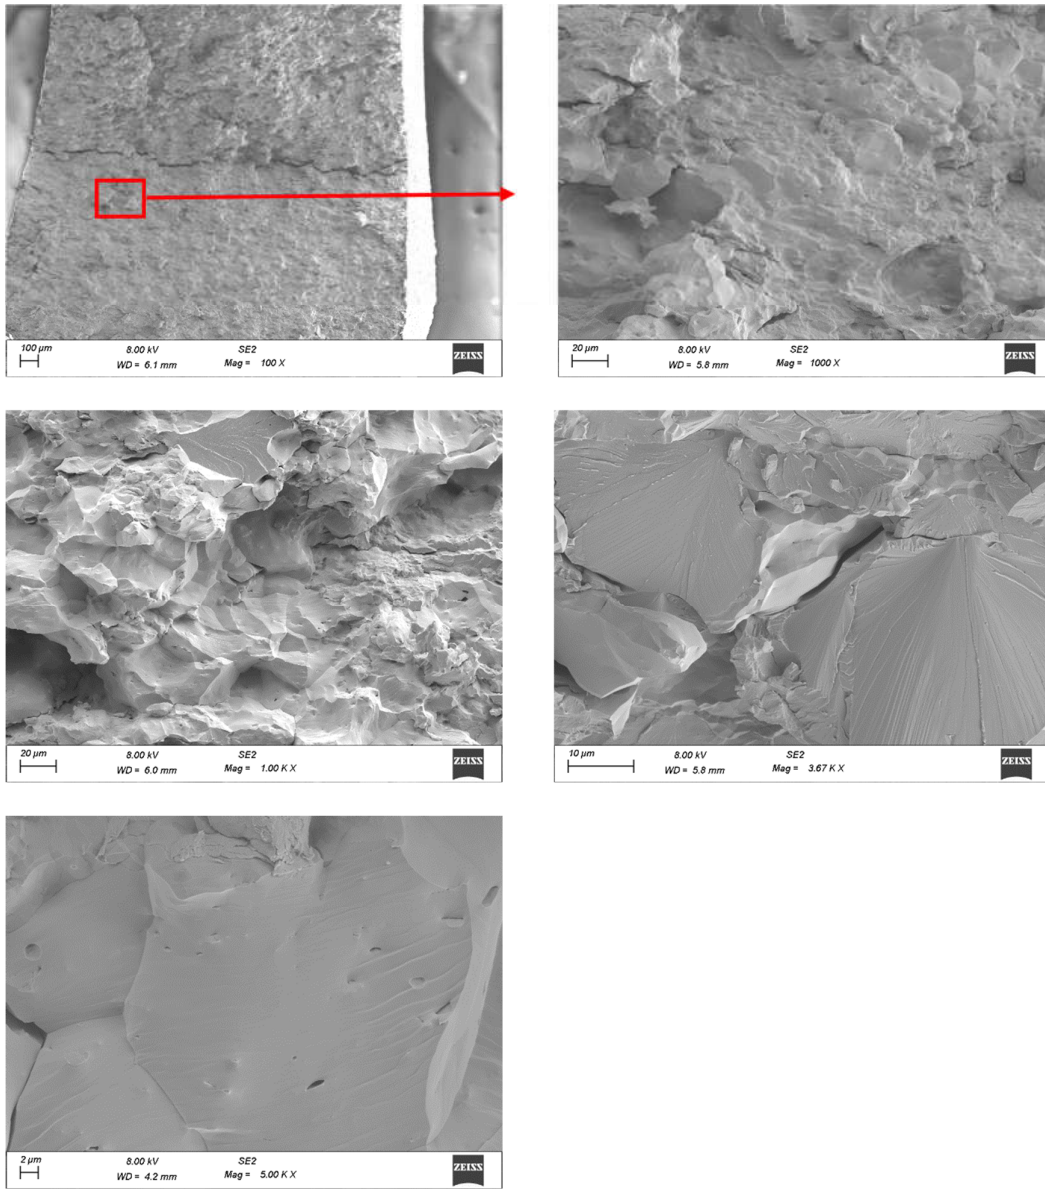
Fracture surface of sample 6 T, away from the surface; L is horizontal; mixture of cleavage and intergranular decohesion.
